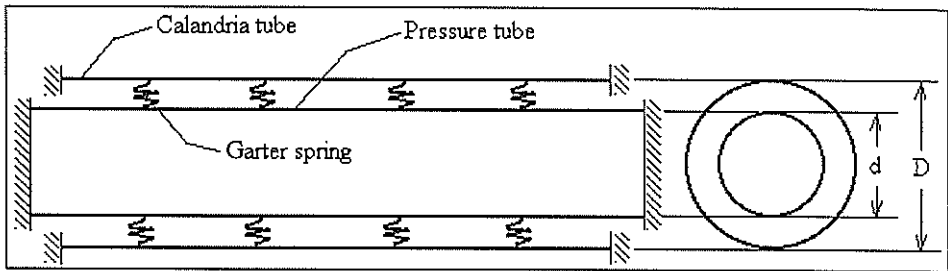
Calandria tube - Pressure tube assembly with Garter springs
